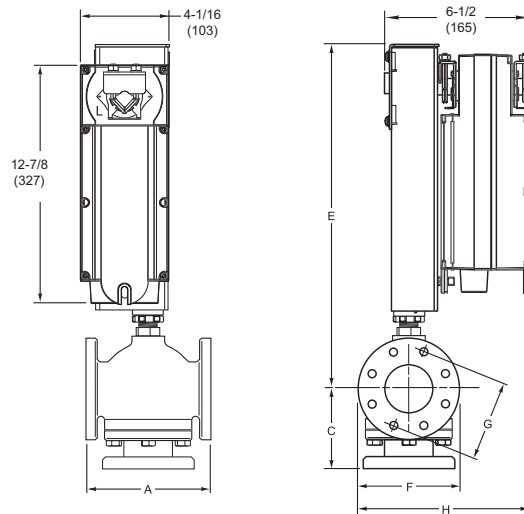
Mx41-634x with 6" Flanged 3-Way Globe Valves
